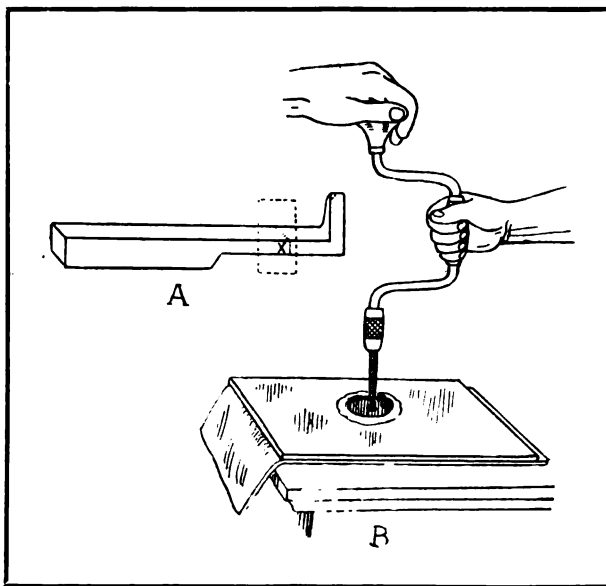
A, Method of Tempering Small Metal Parts; B, Boring Glass with Improvised Tools.
